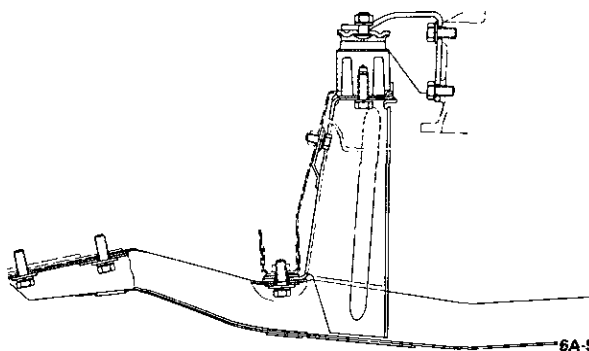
A-9 Left Front Engine Suspension with Cross Member (GT)
